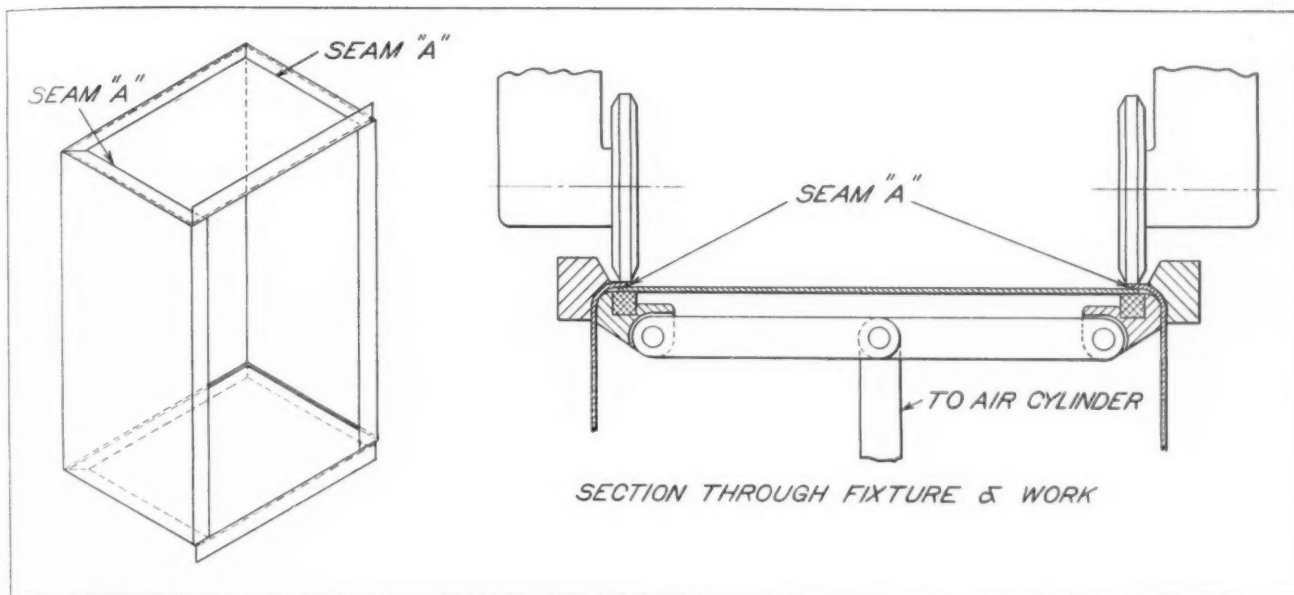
Diagrammatic View of the Inner Liner of a Refrigerator and Section Showing How Seam Welding is Applied to It
